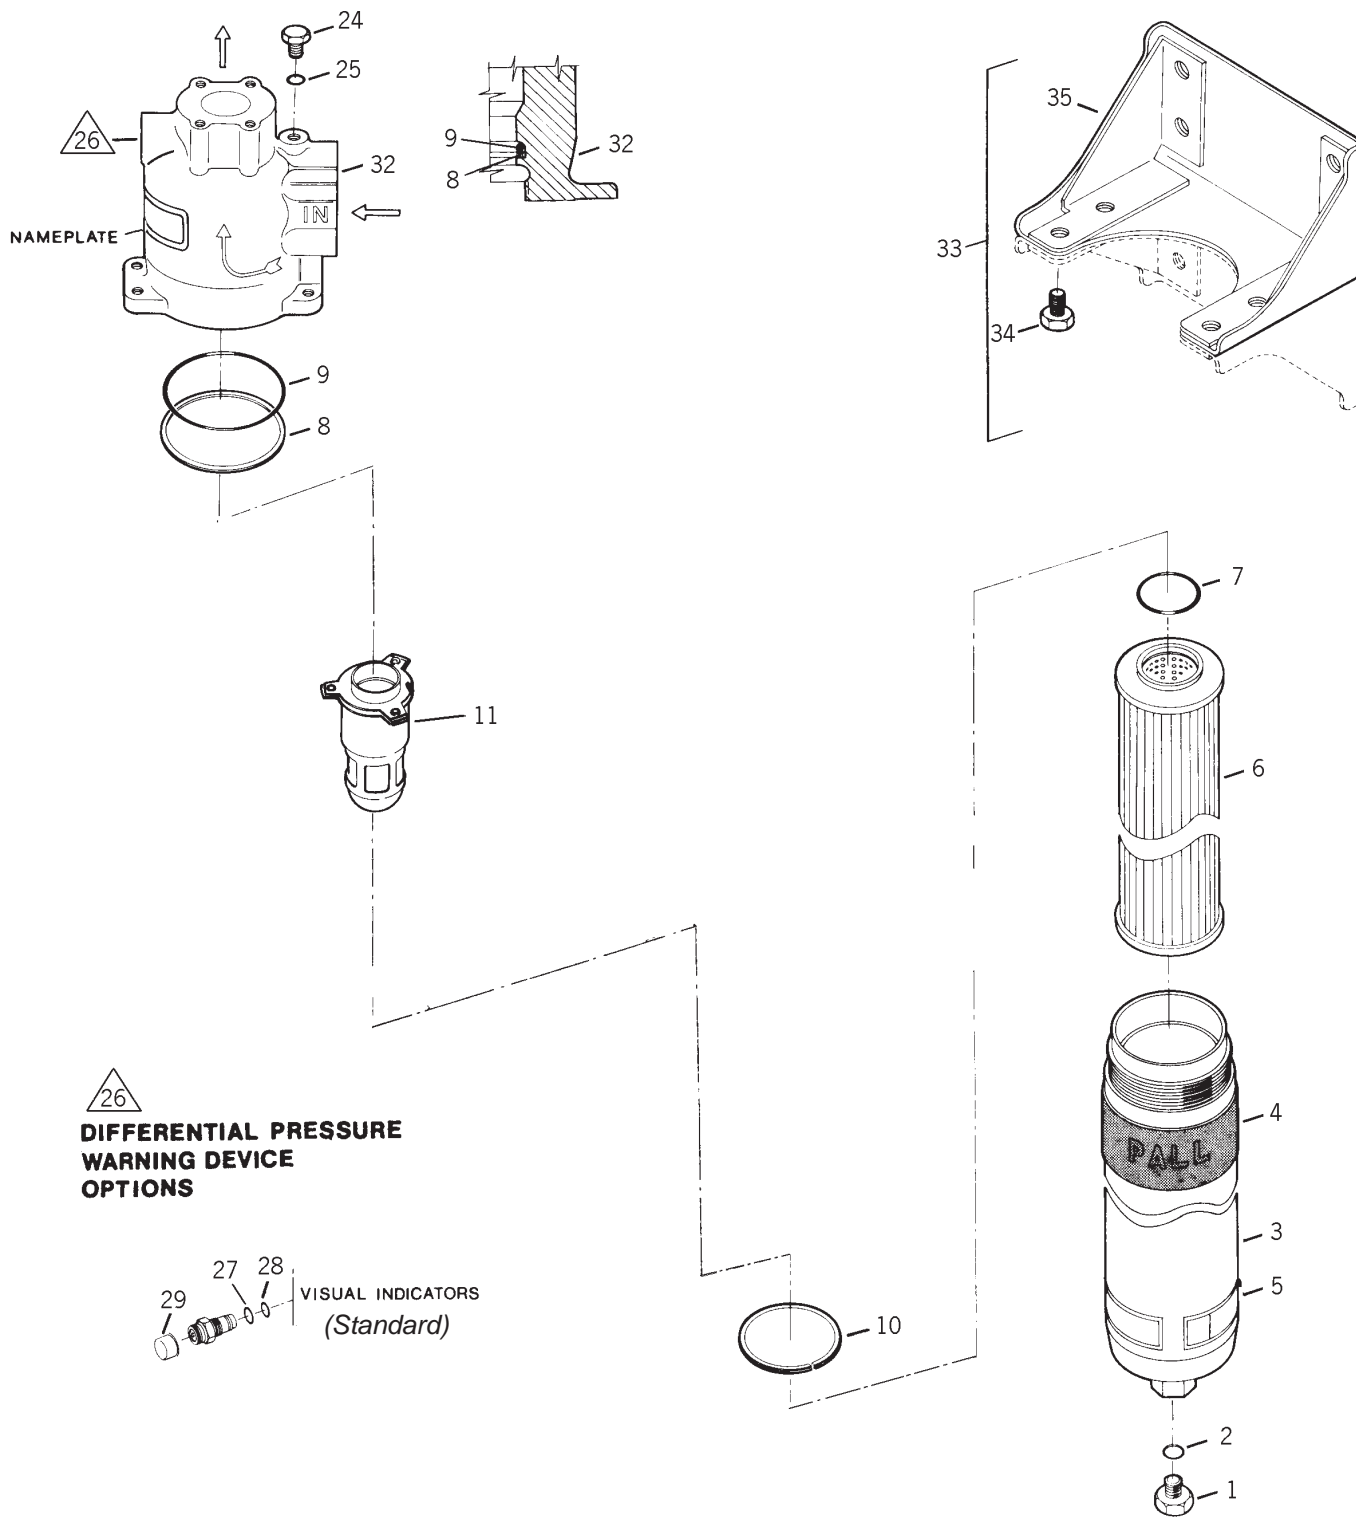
Loop Filter - Exploded View (PIHC-SI-966B)
